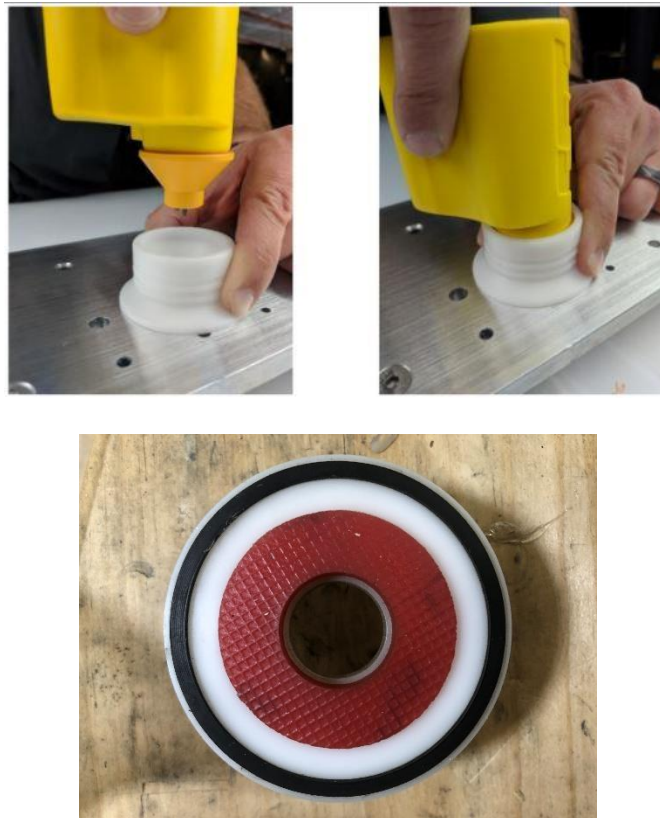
E-Drill locator and red gasket (Courtesy of PPEDM)
